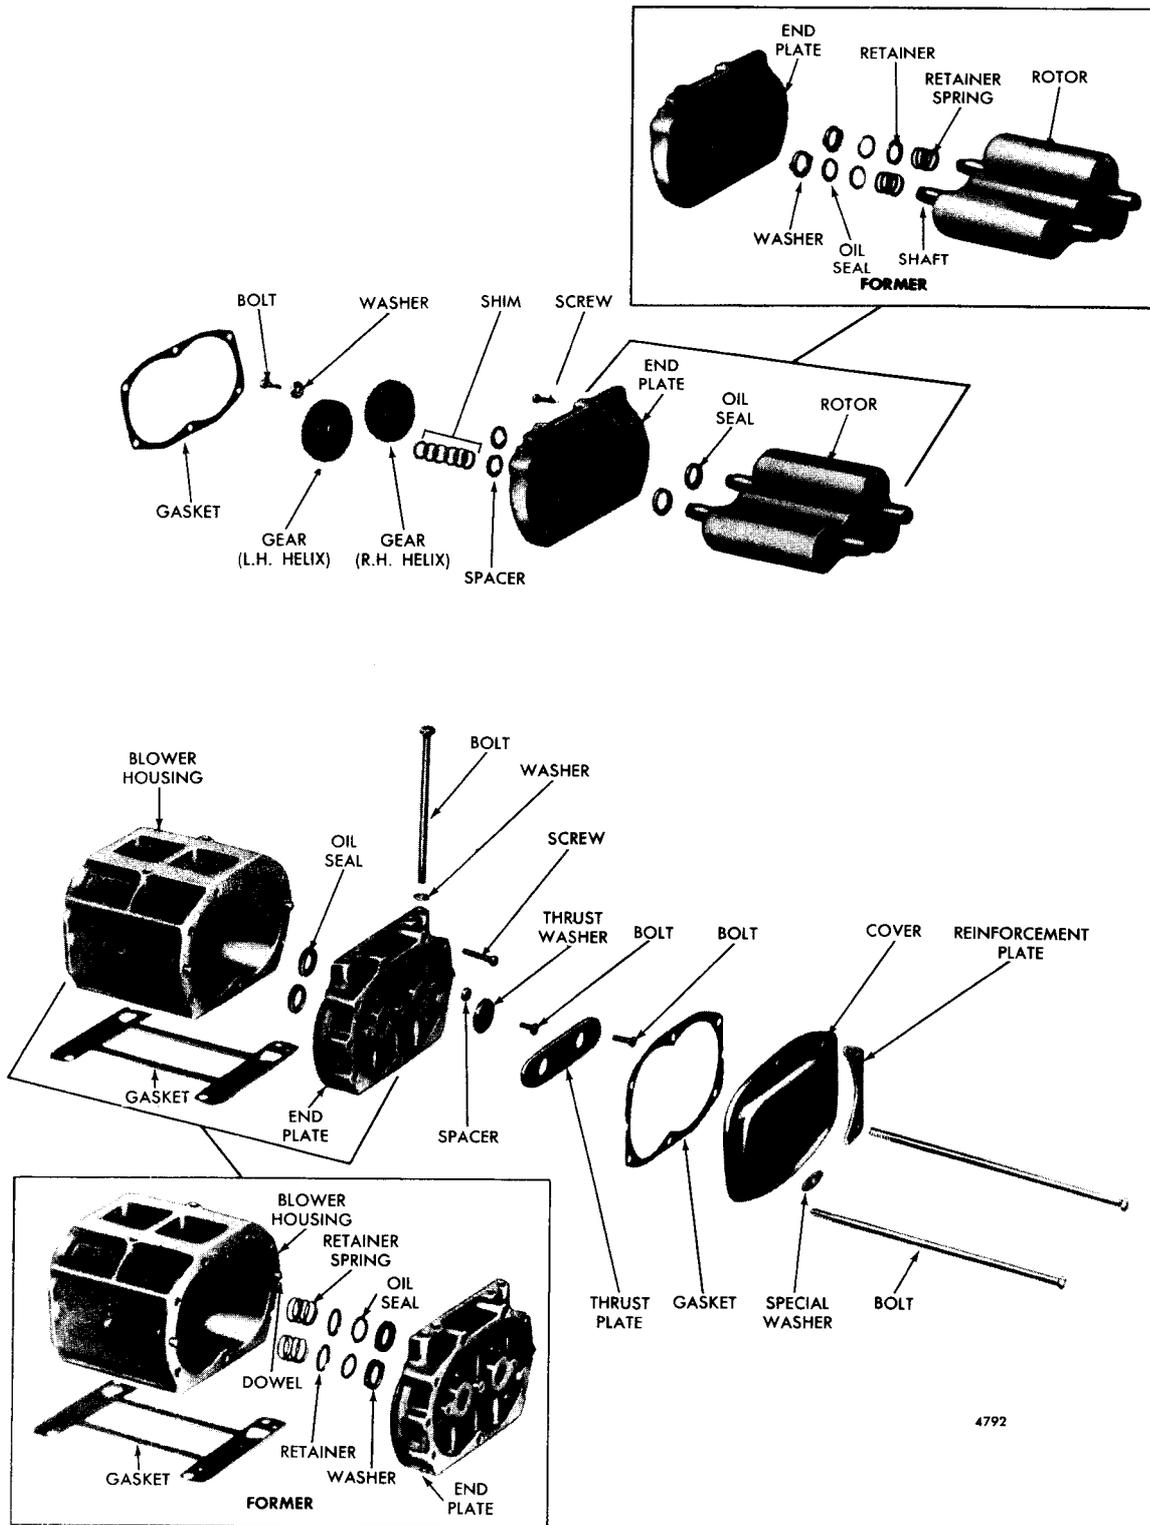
Typical Blower Details and Relative Location of Parts (3-53 Engine Blower)
